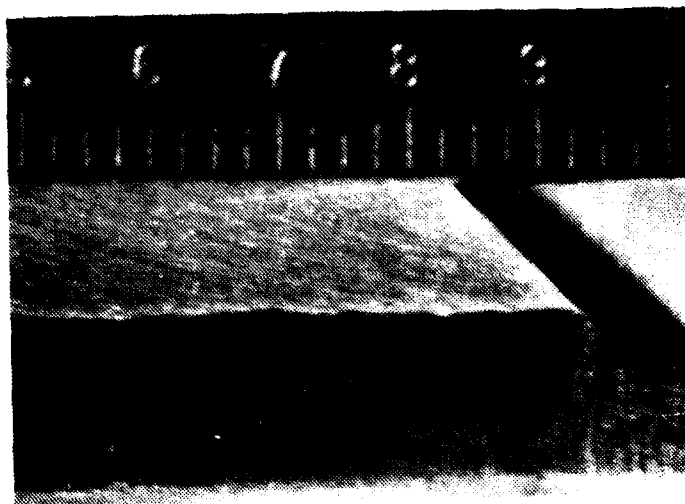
Ni-Cu Specimen, painted, right end of section, 7.5 X.
